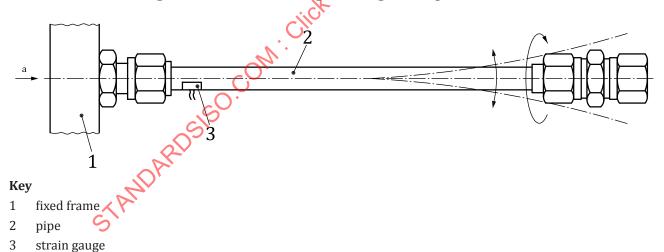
Configuration of coupling assemblies for flexure fatigue resistance test
